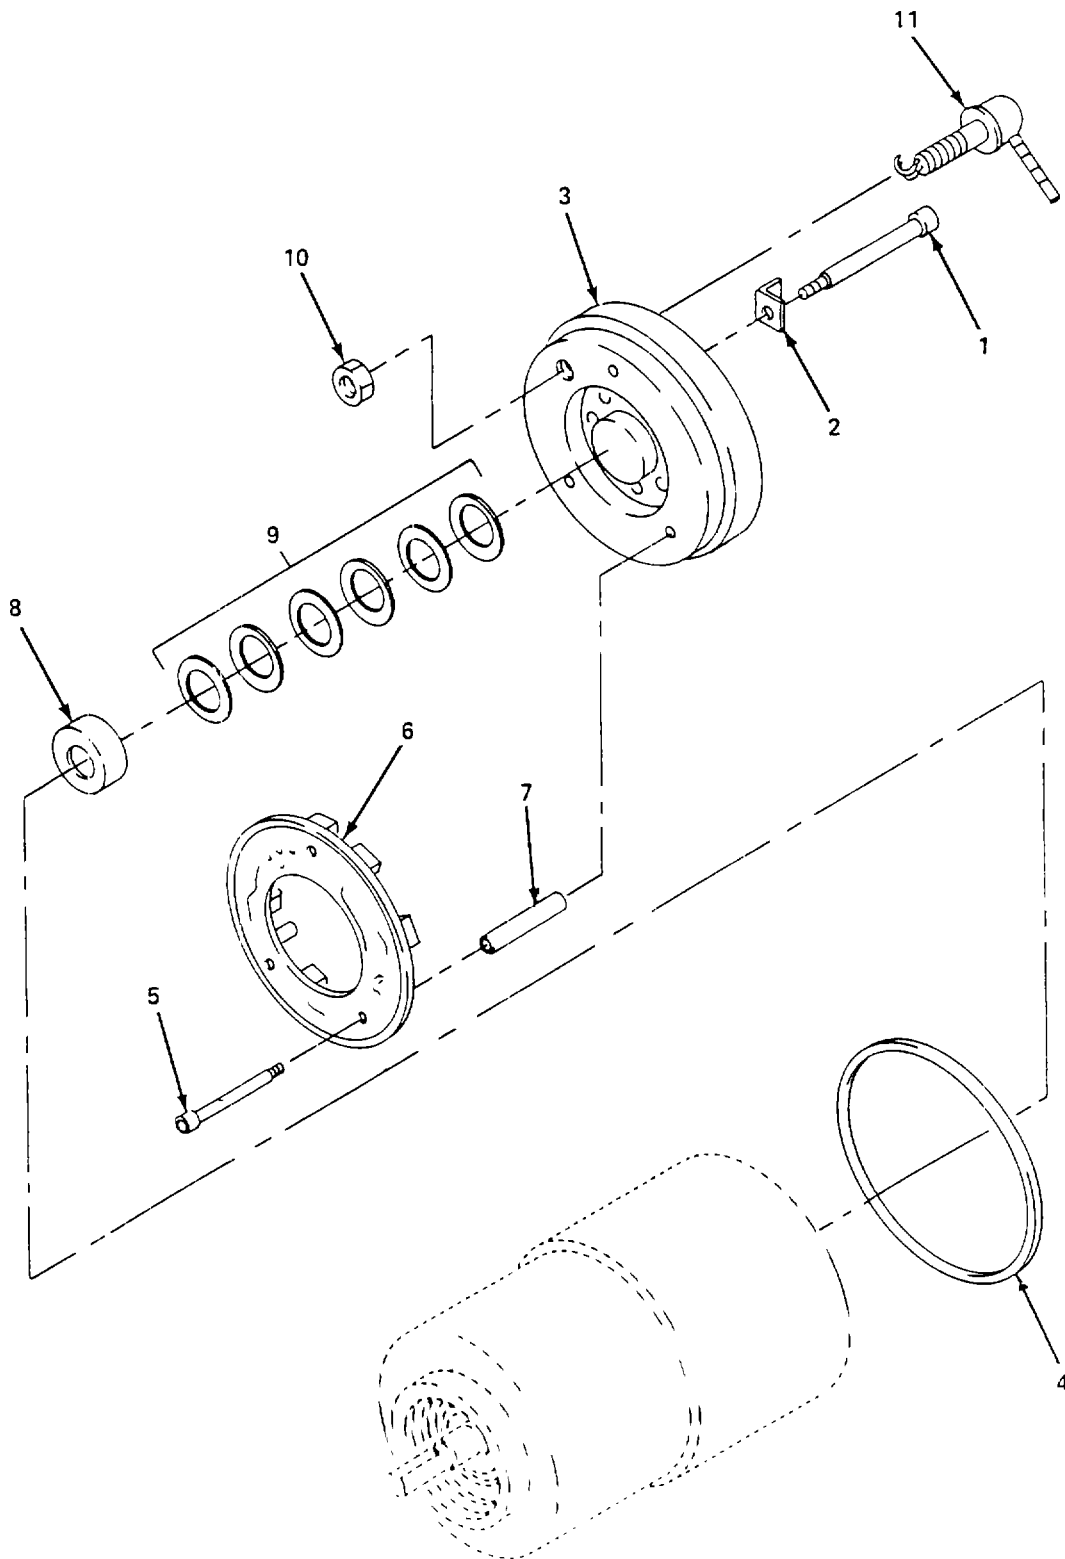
Motor, Repair (Sheet 1 of 2).
